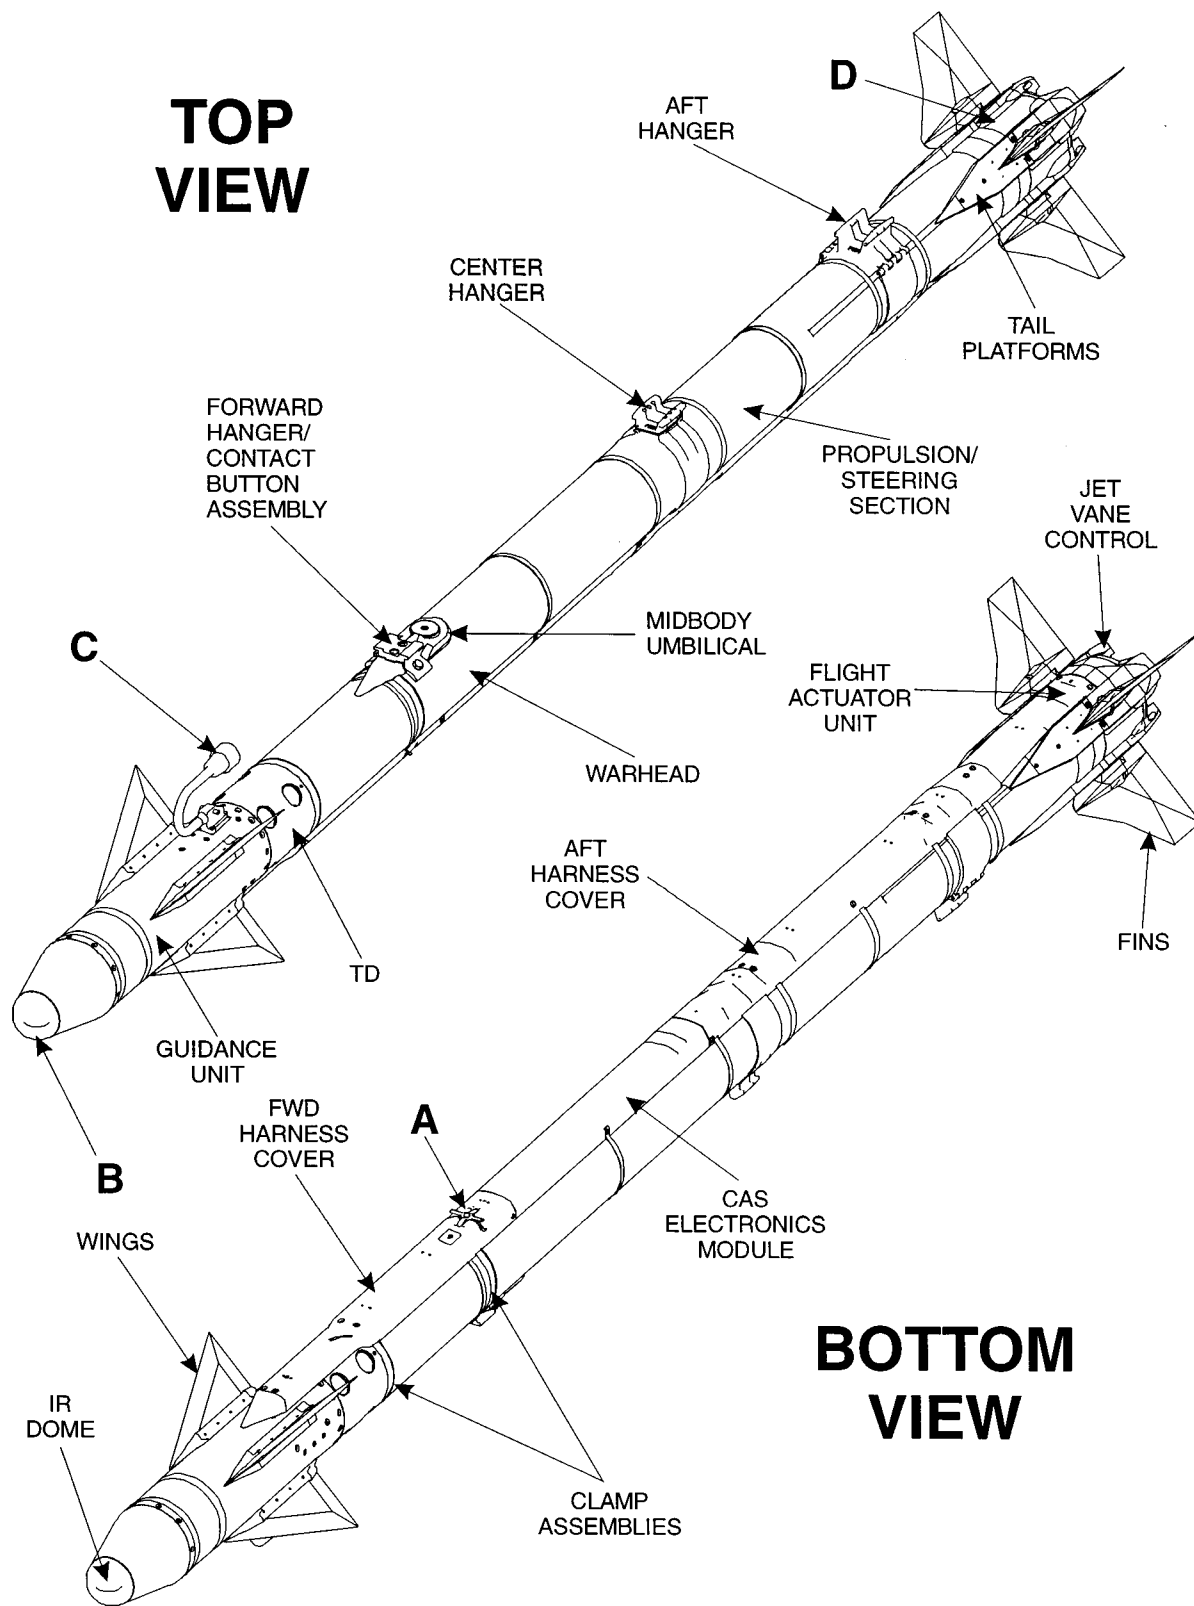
AIM-9X Missile Inspection (Sheet 1 of 3)
